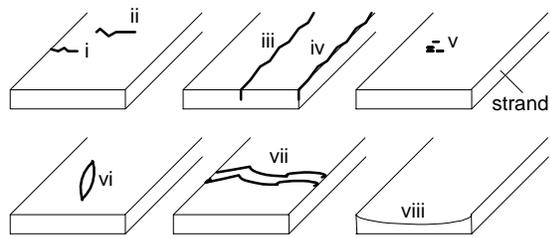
Surface defects. i.) Transversal corner crack. ii.) Transversal center crack. iii.) Longitudinal center crack. iv.) Longitudinal off-corner crack. v.) Inclusions. vi.) Bleeder. vii.) Oscillation marks. viii.) Longitudinal depression.
